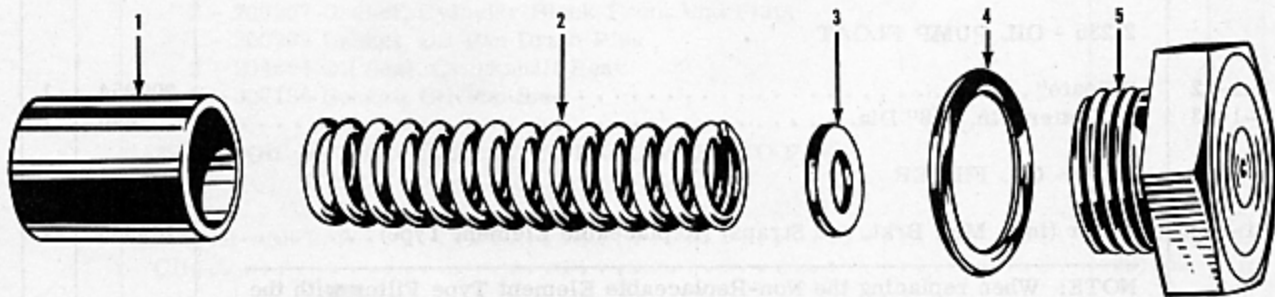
OIL PRESSURE RELIEF VALVE - EXPLODED VIEW
